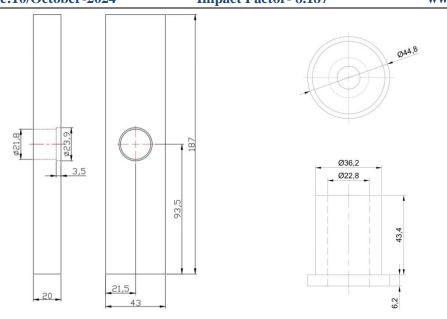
,4,5,6: Design of Die block holder, Punch holder, Injector Guide and Injector
